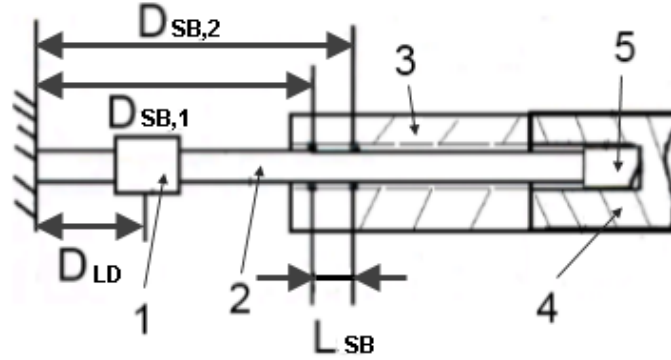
Sketch of the setup of BTA tool. 1: Lanchester damper, 2: Boring bar, 3: Stuffing box, 4: Workpiece, 5: BTA tool head.
